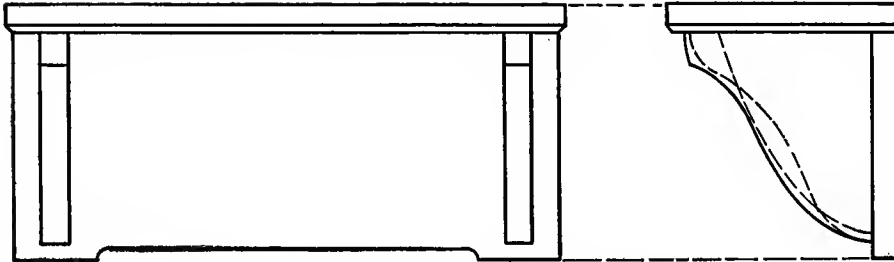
Mechanical Drawing of Shelf, without Dimensions
